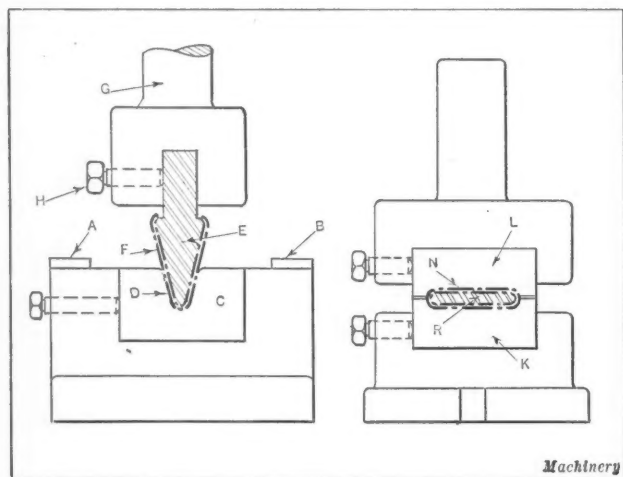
Bending and Forming Dies for Flat Tubular Piece
